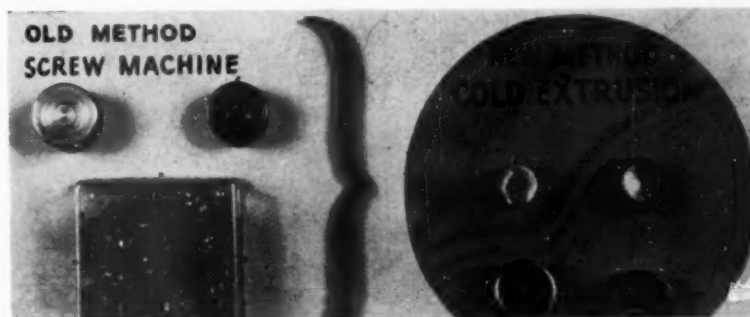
Comparison of production methods for the manufacture of propeller shaft spider bearings. This
